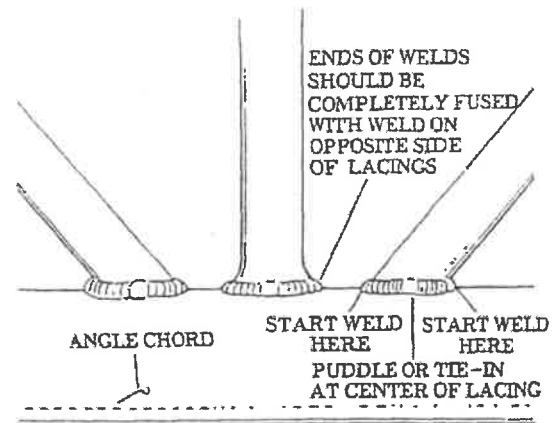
Welding Lacings to Angle Cord
